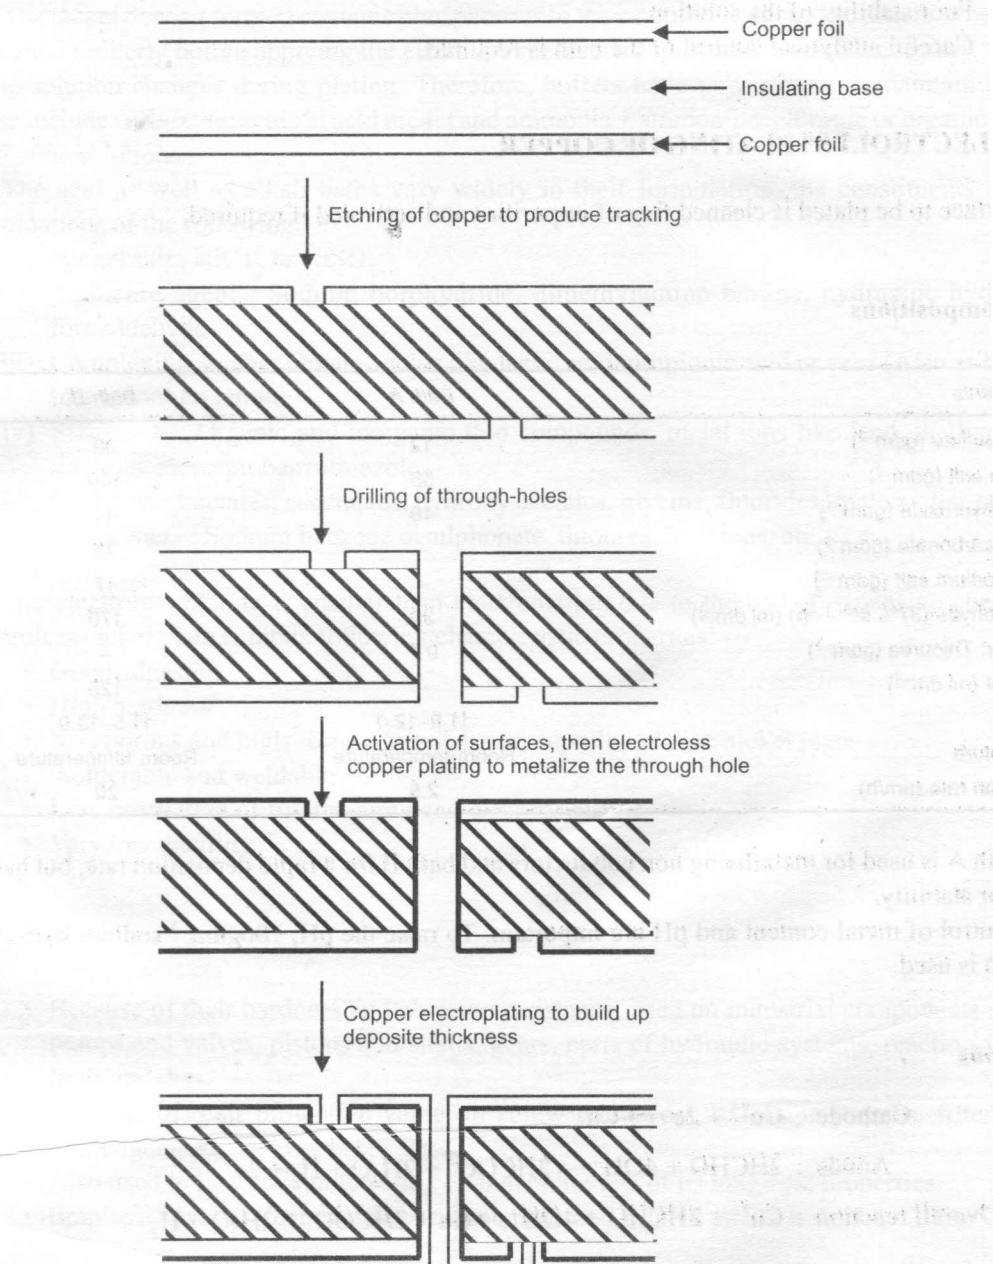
Steps involved in the manufacture of double sided PCB
